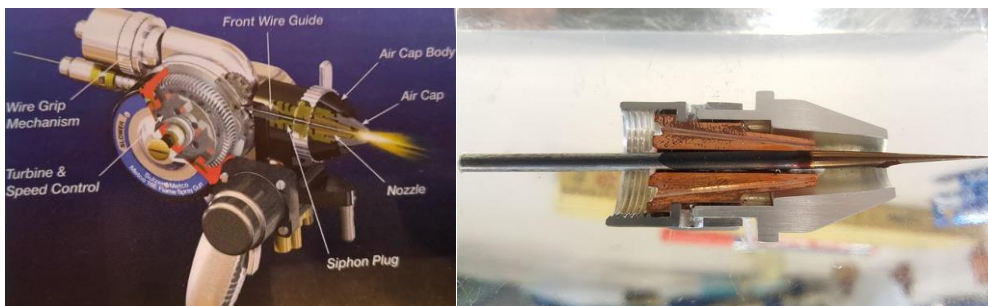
Cross section through hand spray head and the nozzle [9]
